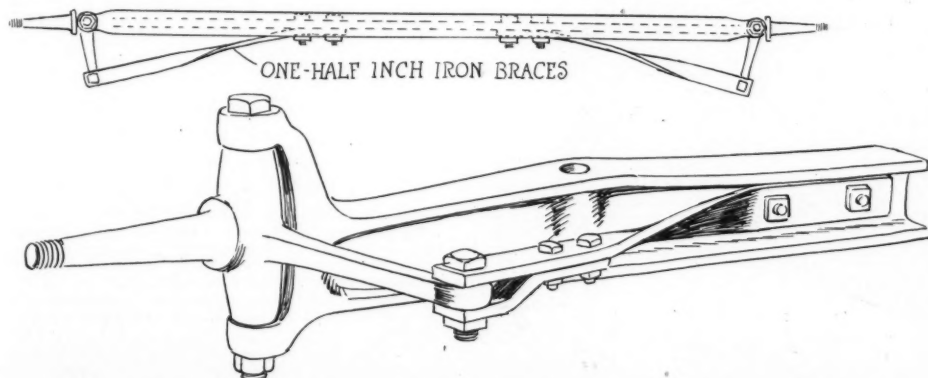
Iron braces used to hold spindles rigid in using Ford wheels on trailer
